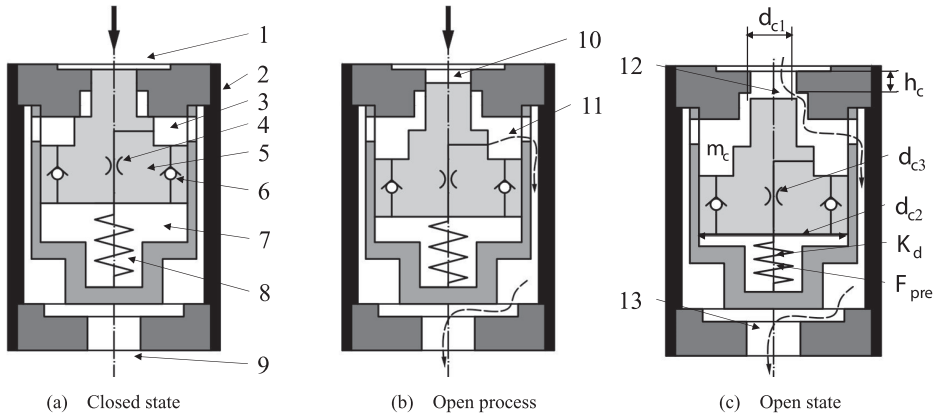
Structure and working process of the FSD valve [12]. (a) Closed state; (b) Open process; (c) Open state. 1-Rebound chamber; 2-Valve body; 3-First auxiliary chamber; 4-Constant orifice; 5-Auxiliary piston; 6-Check valve; 7-Second auxiliary chamber; 8-Spring; 9-Compression chamber; 10-Auxiliary piston upper orifice; 11,12,13-Directions of oil flow.
